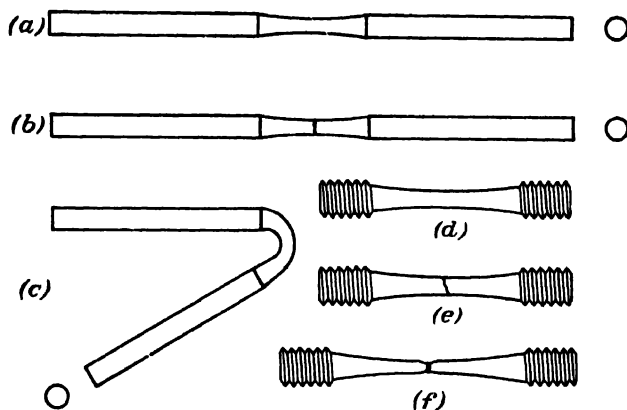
Test specimen after single-load test and after fatigue test: (a) original flexure specimen; (b) specimen fractured by repeated cycles of reversed flexure; (c) specimen bent by single load; (d) original tension specimen; (e) specimen fractured by repeated cycles of tension; (f) specimen fractured by one slowly applied load.
